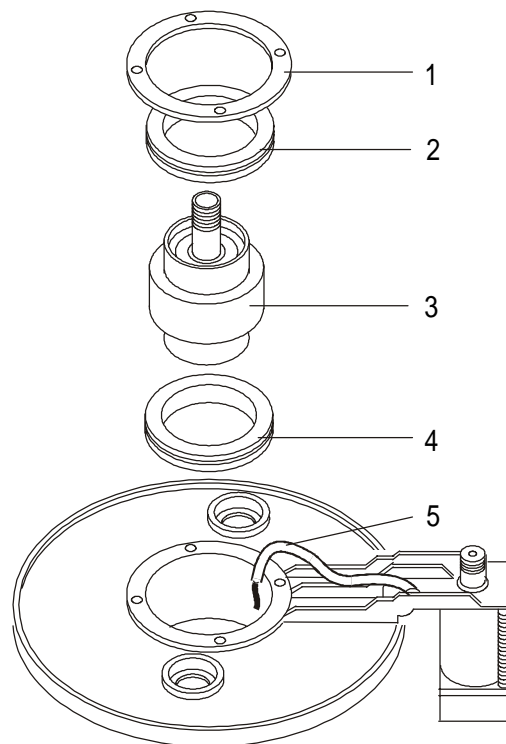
Removing the bearing housing from underneath the lower end cover
